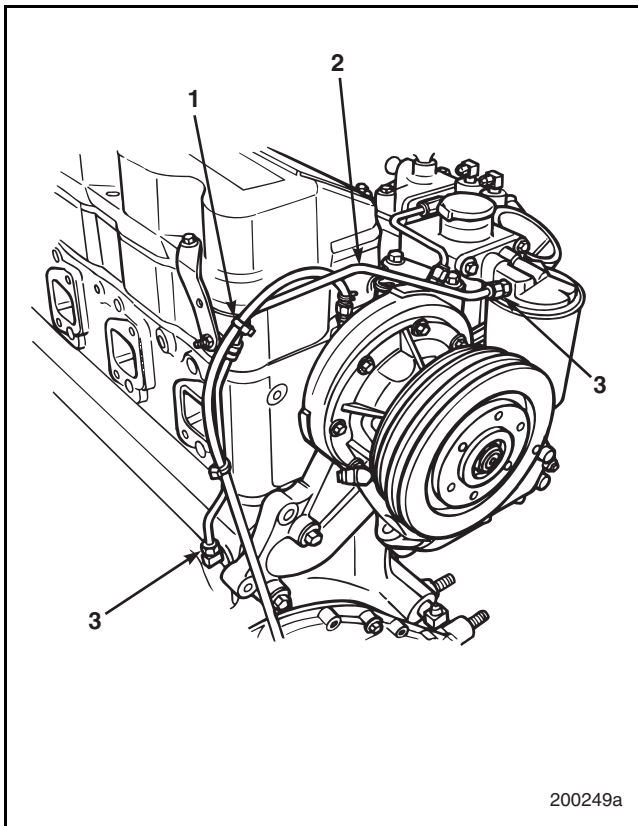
Coolant Conditioner Supply Tube Removal
